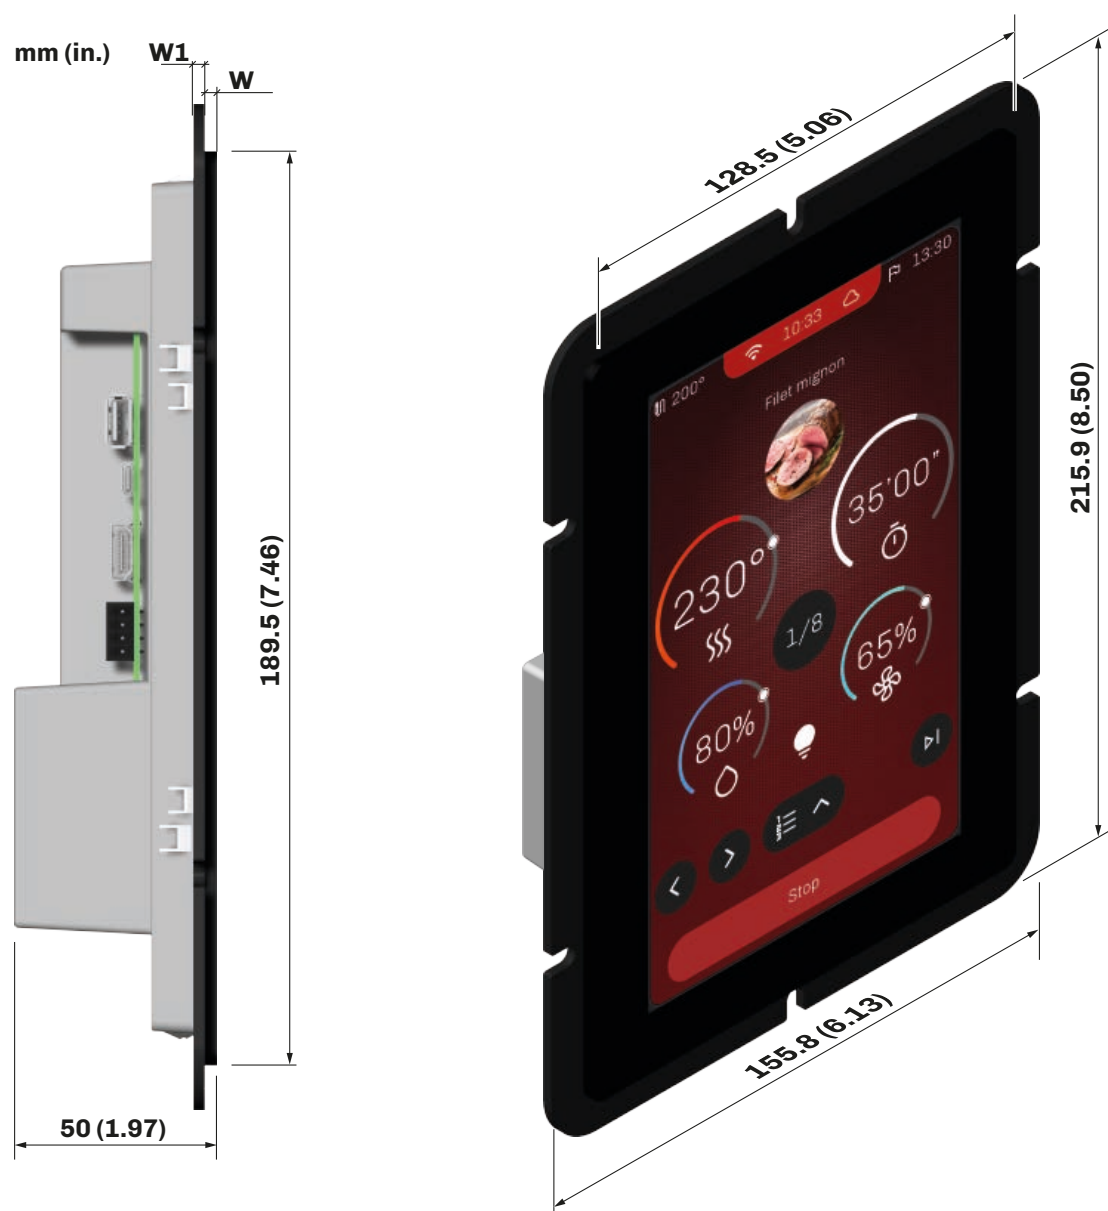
Dimensions *User interface | Models with front mounting
